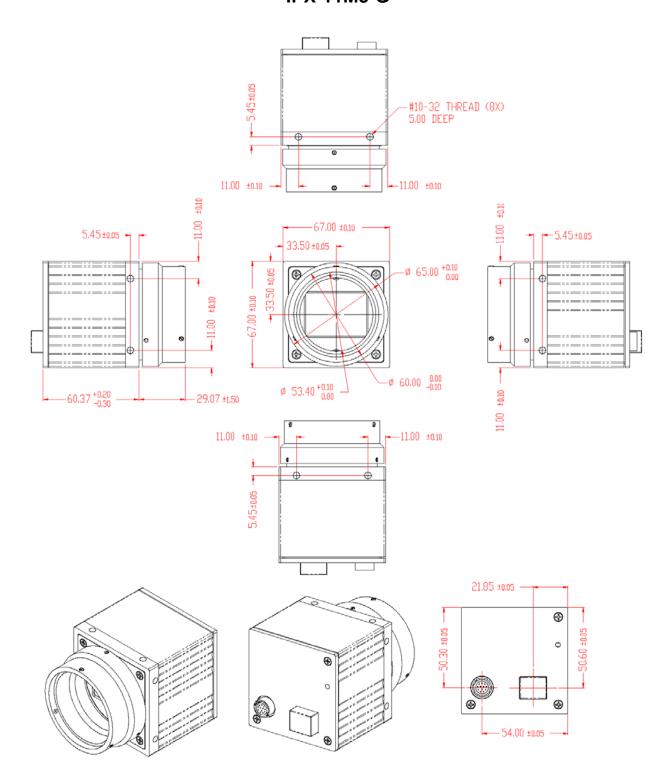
IPX-11M5-G (Silver Body) Dimensional Drawings
